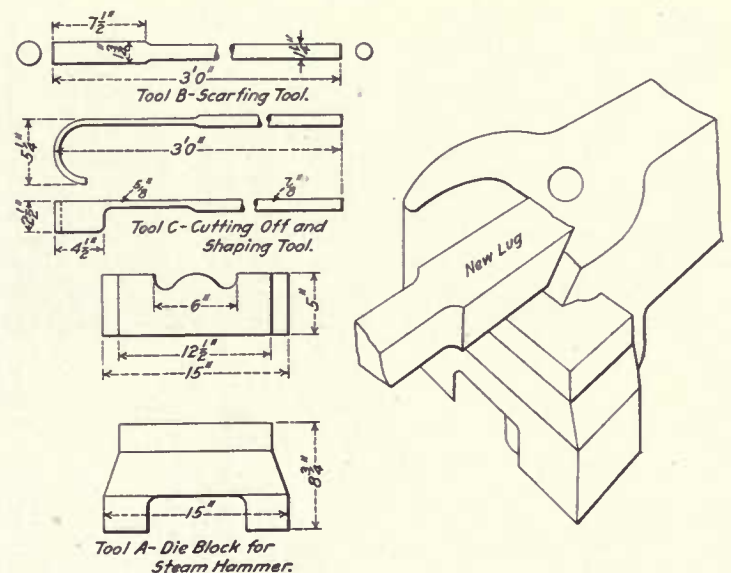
Welding Tools for Broken Steel Couplers.
